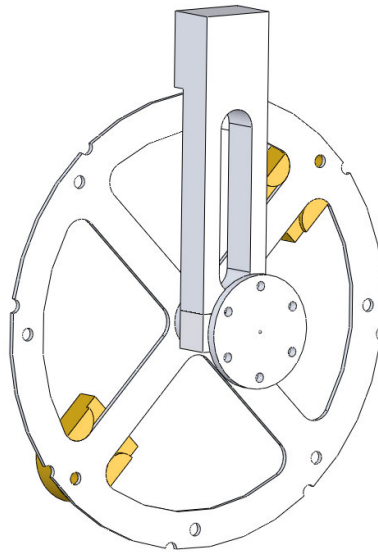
A CAD rendering of an early prototype with a reaction wheel attached to the motor's shaft. The reaction wheel, which turns in the opposite direction of the main wheel attached to the gearbox output, serves to cancel out the change in angular momentum when starting and stopping the main wheel.
